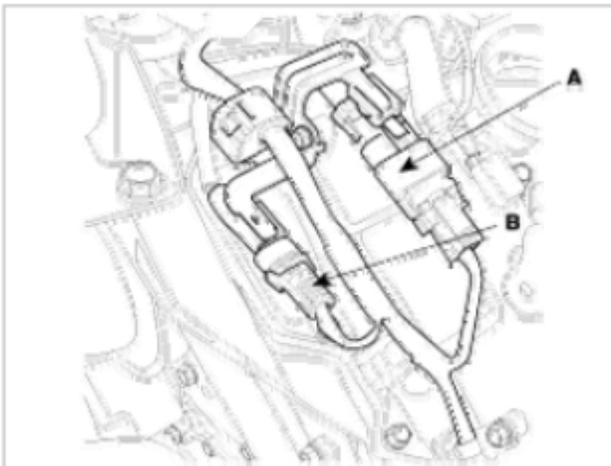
Locating OCV Connector And Knock Sensor Connector
